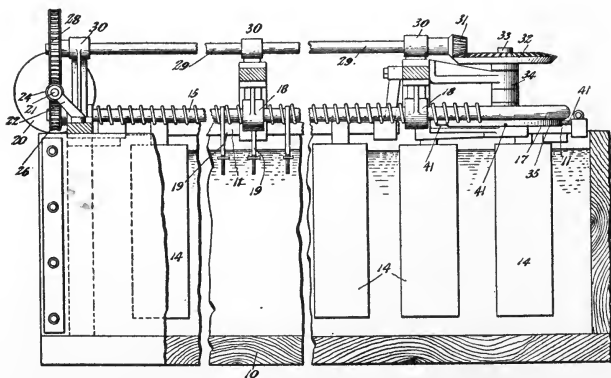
SIDE ELEVATION OF DANIELS SCREW CONVEYER MACHINE
